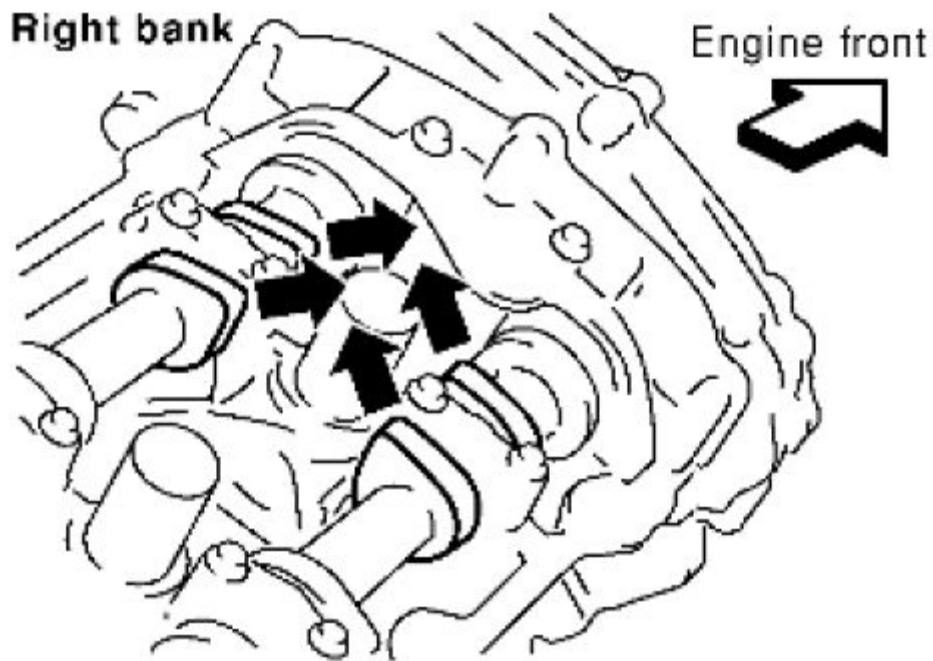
Identifying Intake And Exhaust Cam Noses On No. 1 Cylinder
